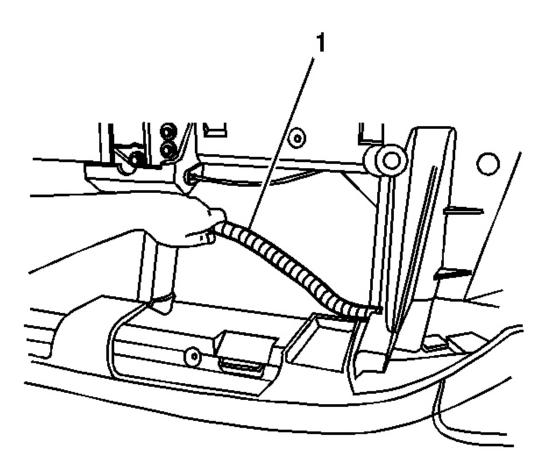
Locating Headlamp Wire Harness Courtesy of GENERAL MOTORS CORP.
